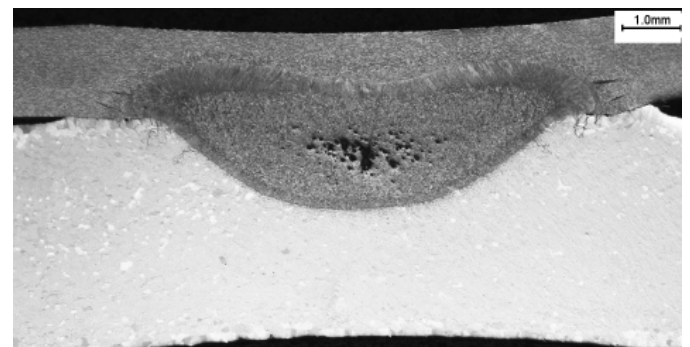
General view of the weld joint with visible cracks and porosity in the welding nugget, etched with Ma1Al
